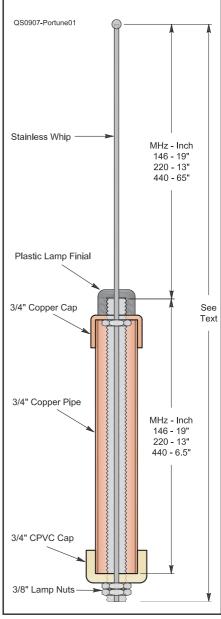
Dimensioned drawing of coaxial dipole for three bands.
